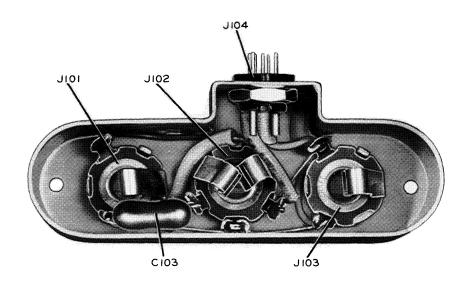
Transceiver 618S-1, Front Panel, Jack Assembly Rear View
